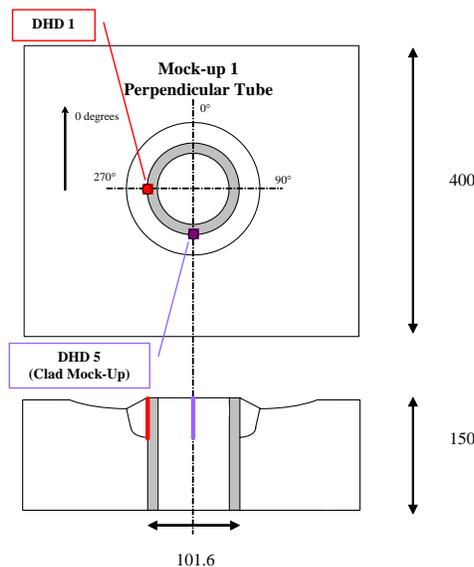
Mock-up 1: central nozzle general arrangement, DHD locations and dimensions (mm)
